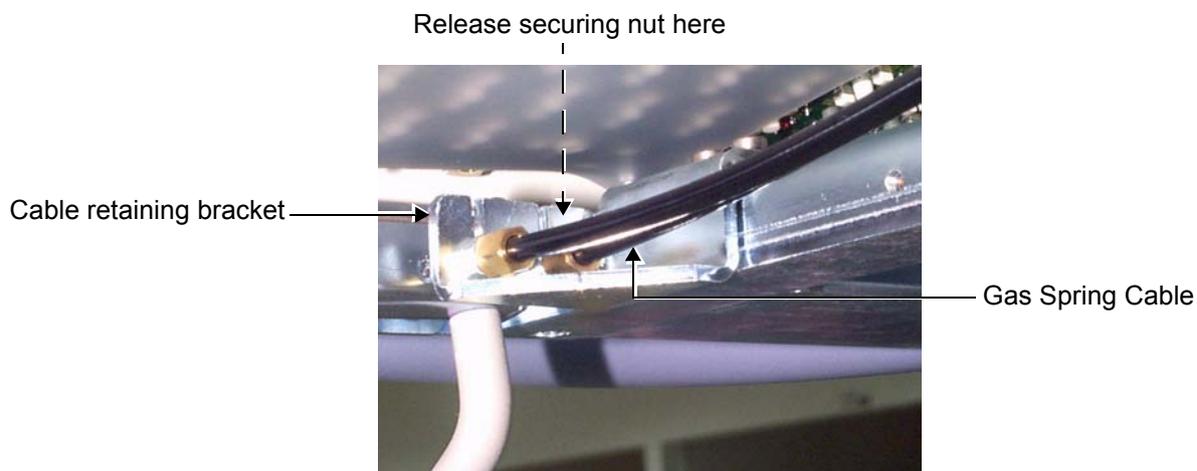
Releasing Gas Spring Cable from Retaining Bracket
